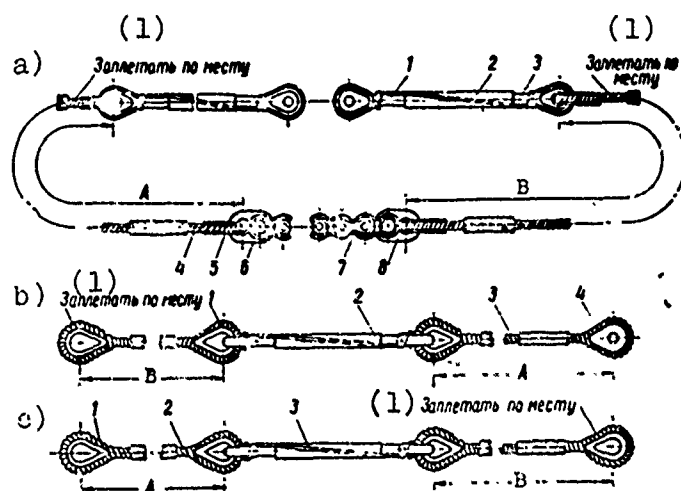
Aircraft control cables: a) chain with control cable of ailerons: 1 - eye of clamp; 2 - clamp coupling; 3 - eye of clamp; 4 - cable  $7 \times 7 - 4.5$  GOST 2172-43; 5 - thimble; 6 - roller; 7 - chain; 8 - link; b) rudder control cable: 1 - thimble; 2 - clamp; 3 - cable  $7 \times 7 - 3.5$  GOST 2172-43; 4 - thimble; c) elevator control cable: 1 - thimble; 2 - cable  $7 \times 7 - 3.5$  GOST 2172-43; 3 - clamp.
